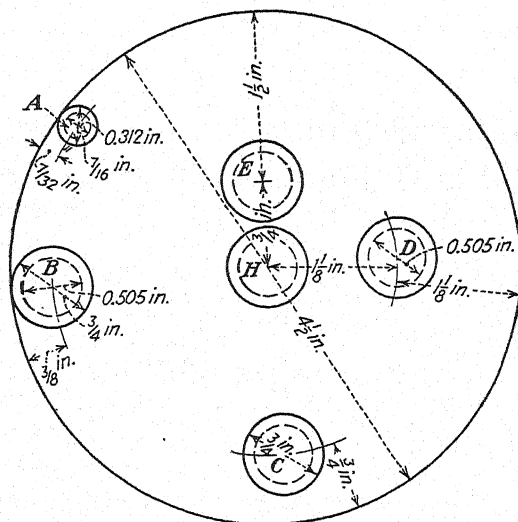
Sectional view of 4.5-in. axle housing showing location of test bars. (*Lake*.⁽⁷³¹⁾)
